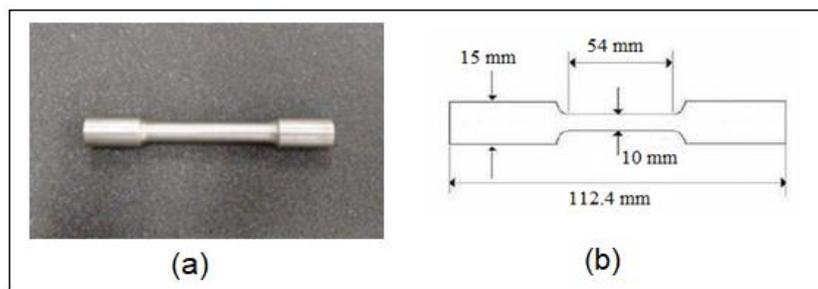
(a) Specimens without welding, (b) dimensions of specimens.
